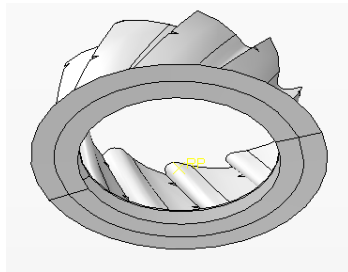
Combination Tool, Smooth Circular Blade and Ten Helix Chipper with CZ10 Chipbreaker.
